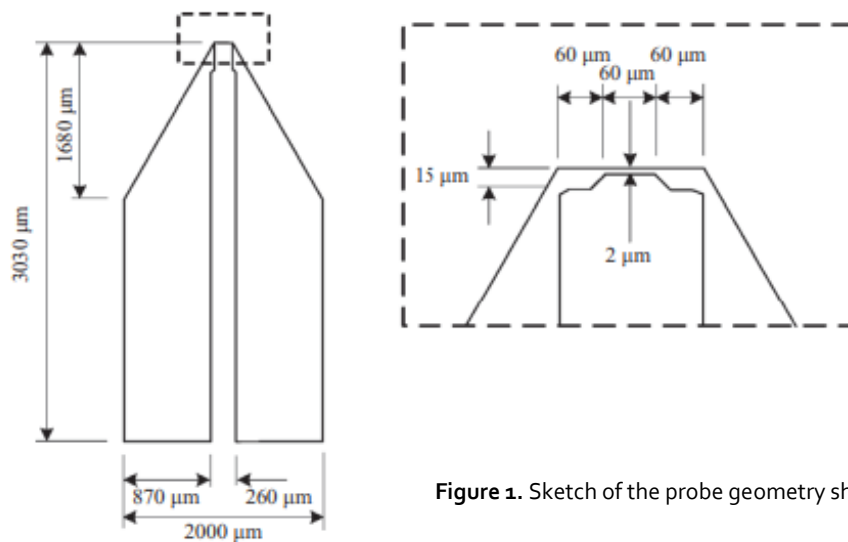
Sketch of the probe geometry showing dimensions of contact pads and wire.
